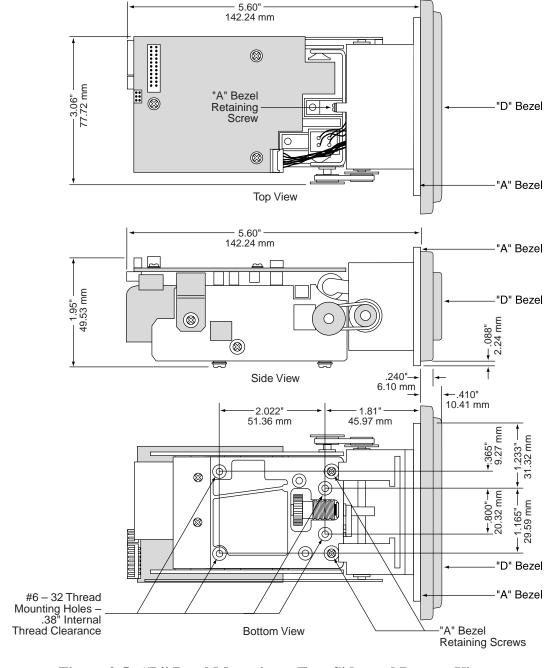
"D" Bezel Mounting – Top, Side, and Bottom Views
